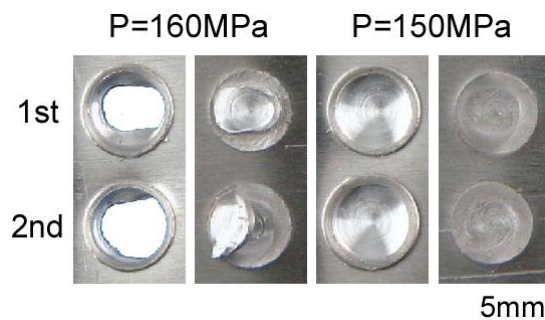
Appearances of tensile shear tested specimen.(L=8mm)
